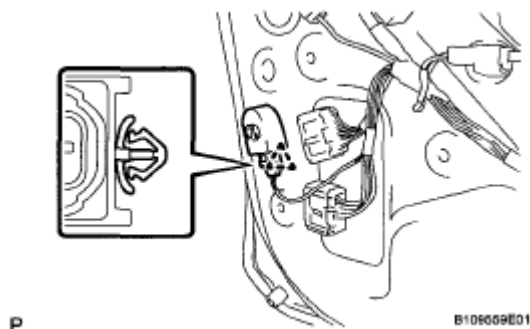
Identifying Power Back Door Warning Buzzer Clamp
